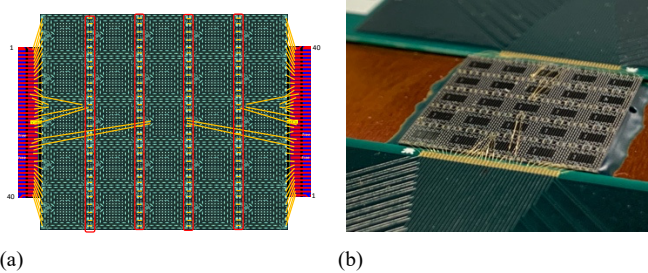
(a) The bonding diagram (b) The assembled TTC.
